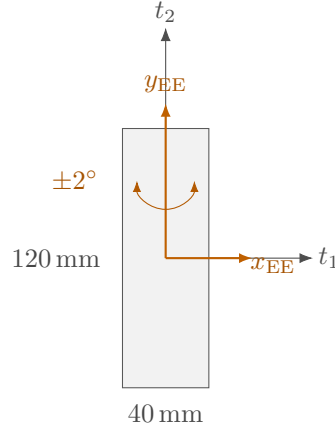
Calibrated tool face and mounting axes in the surface plane.
